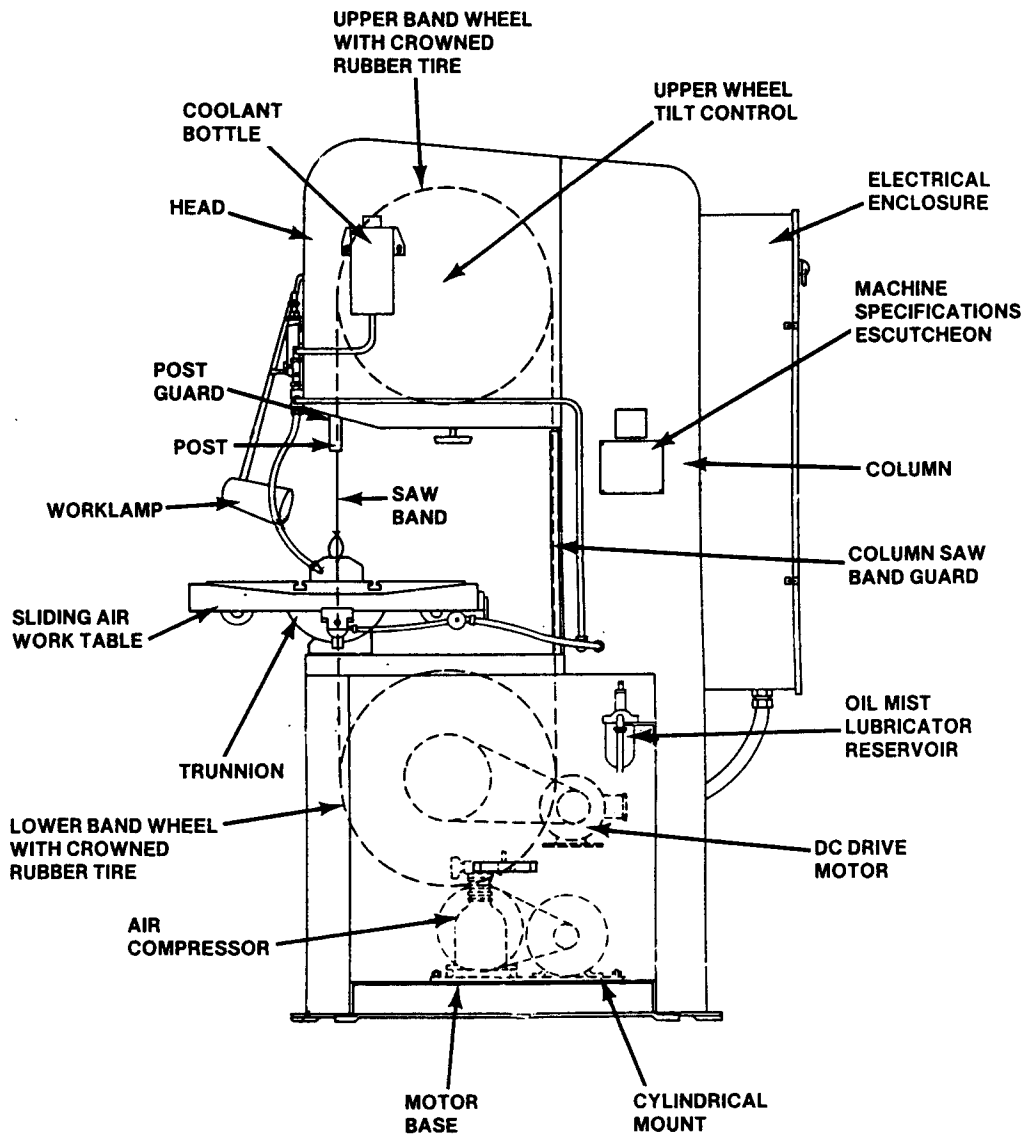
MACHINE FEATURES - FRONT VIEW.
